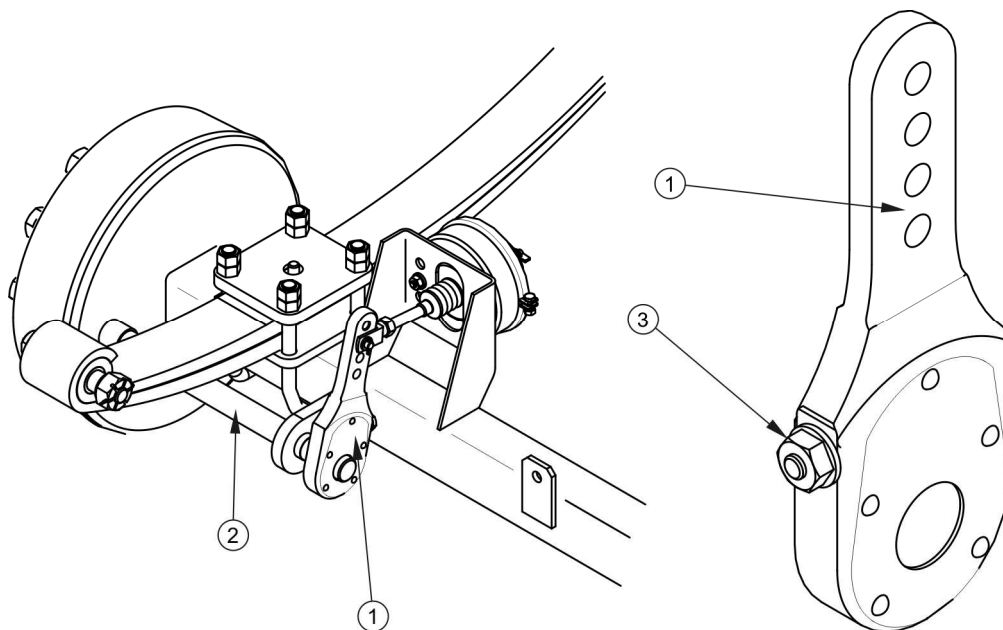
Adjusting of the clearance of the axle bearings
